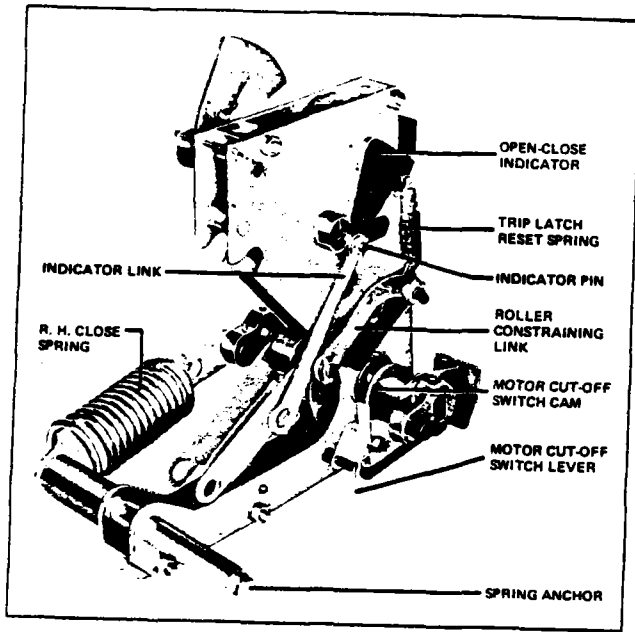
Rear View of Mechanism (Left Close Spring Removed) (383034)
